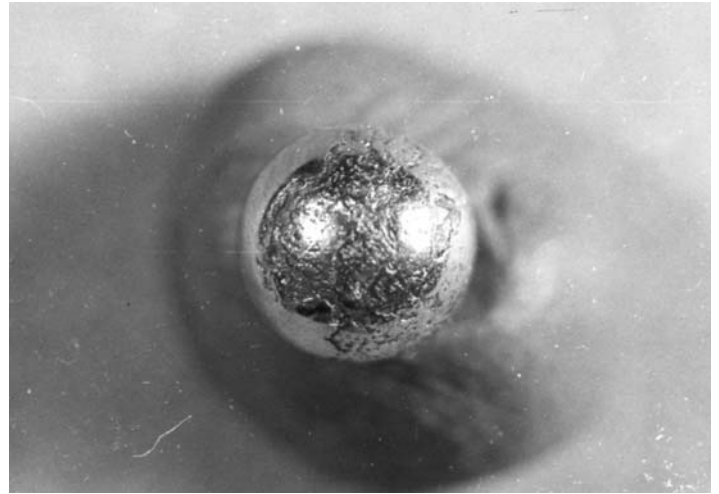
One of the balls of the inner bearing showing excessive wear
